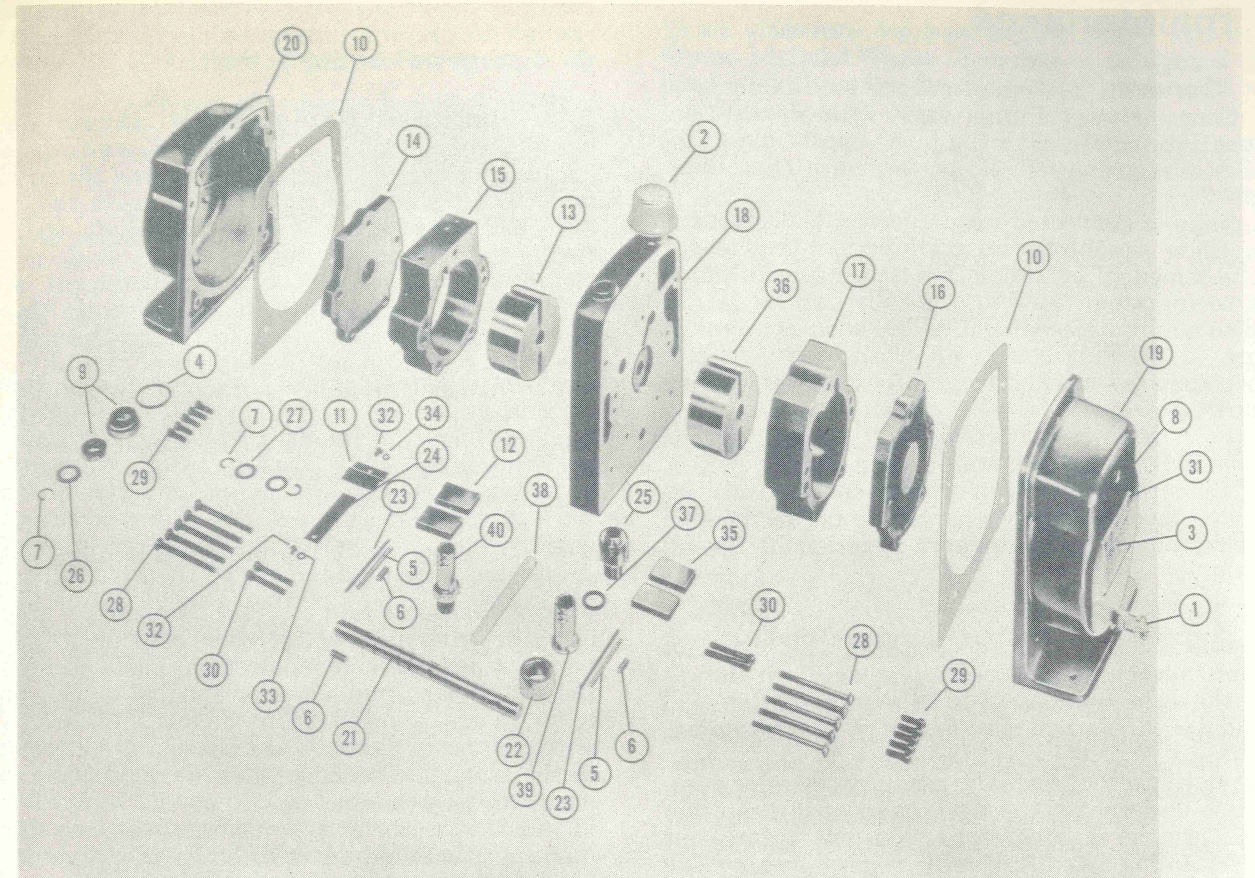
Exploded view of the Hyvac 2, 4, 6, 7, and 14 Pumps
